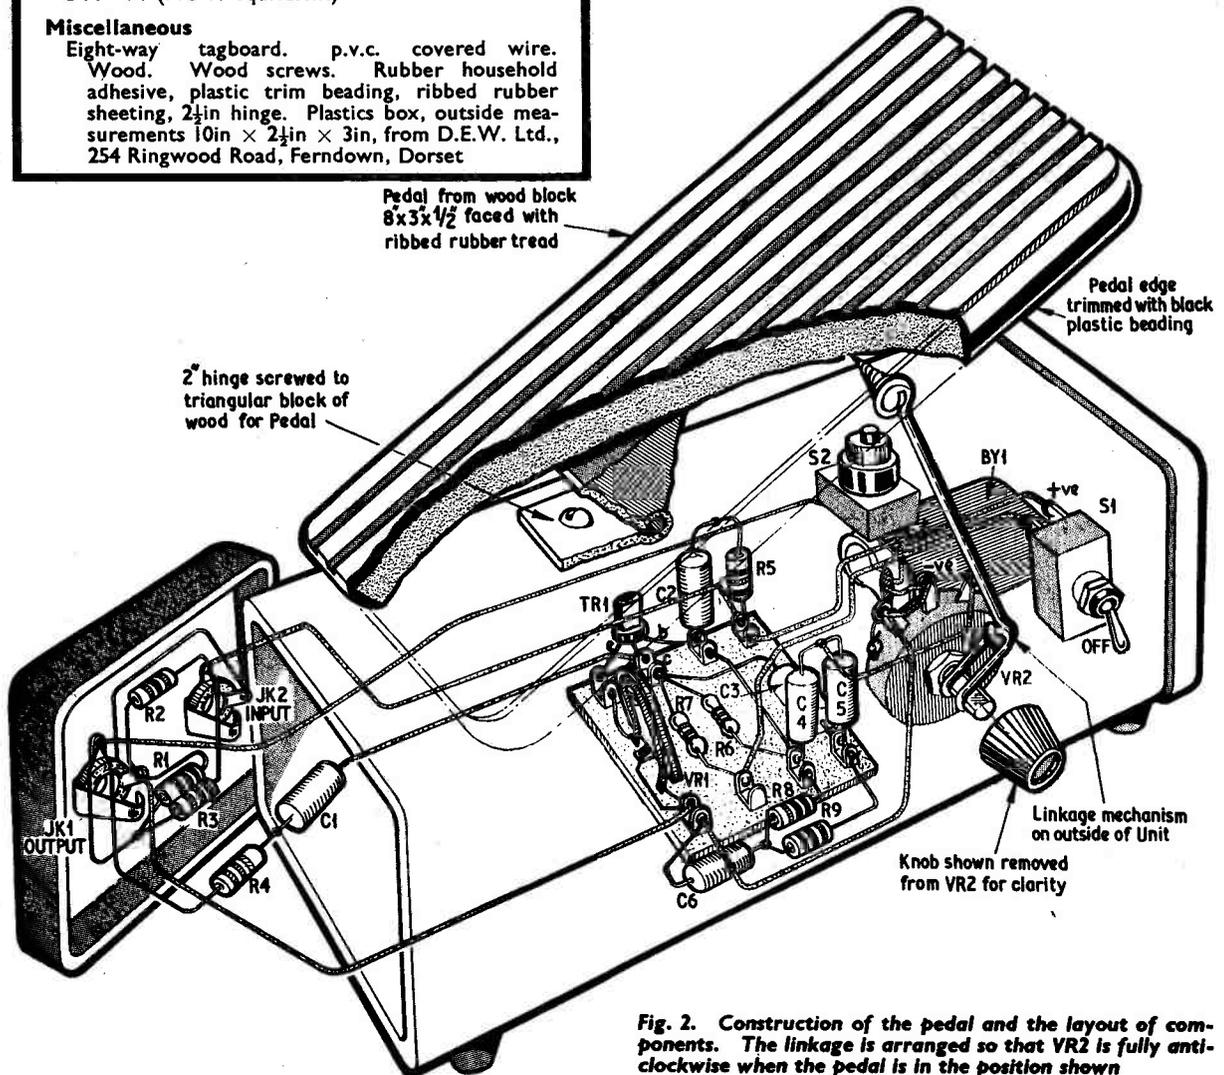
Construction of the pedal and the layout of components. The linkage is arranged so that VR2 is fully anti-clockwise when the pedal is in the position shown
